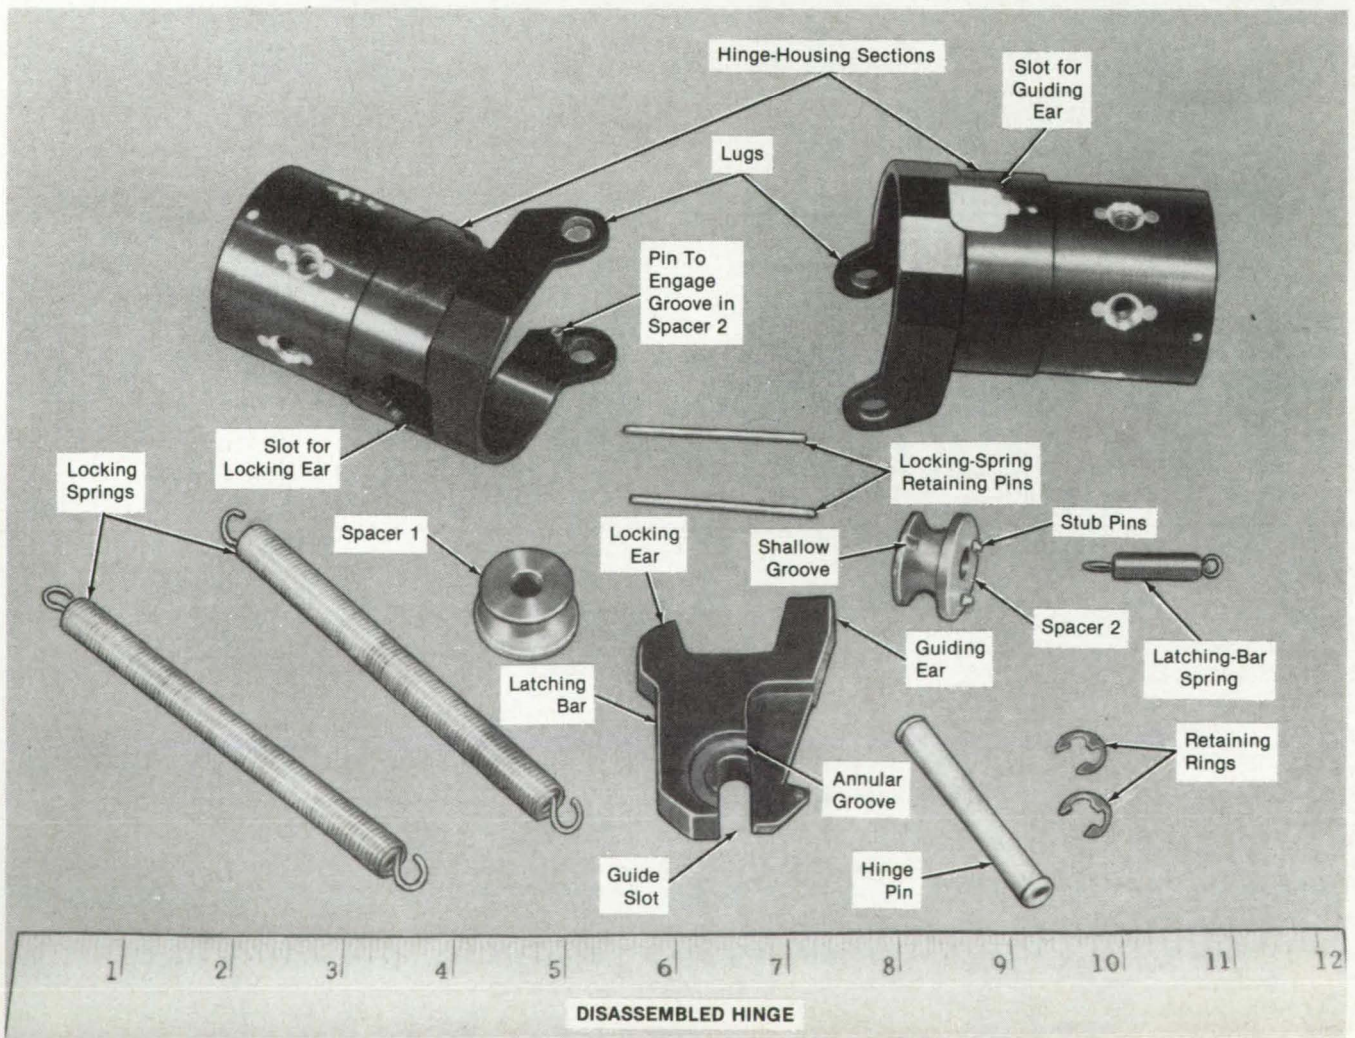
The Parts of the Locking Hinge are assembled into a unit that clamps shut with a little push from the operator.
